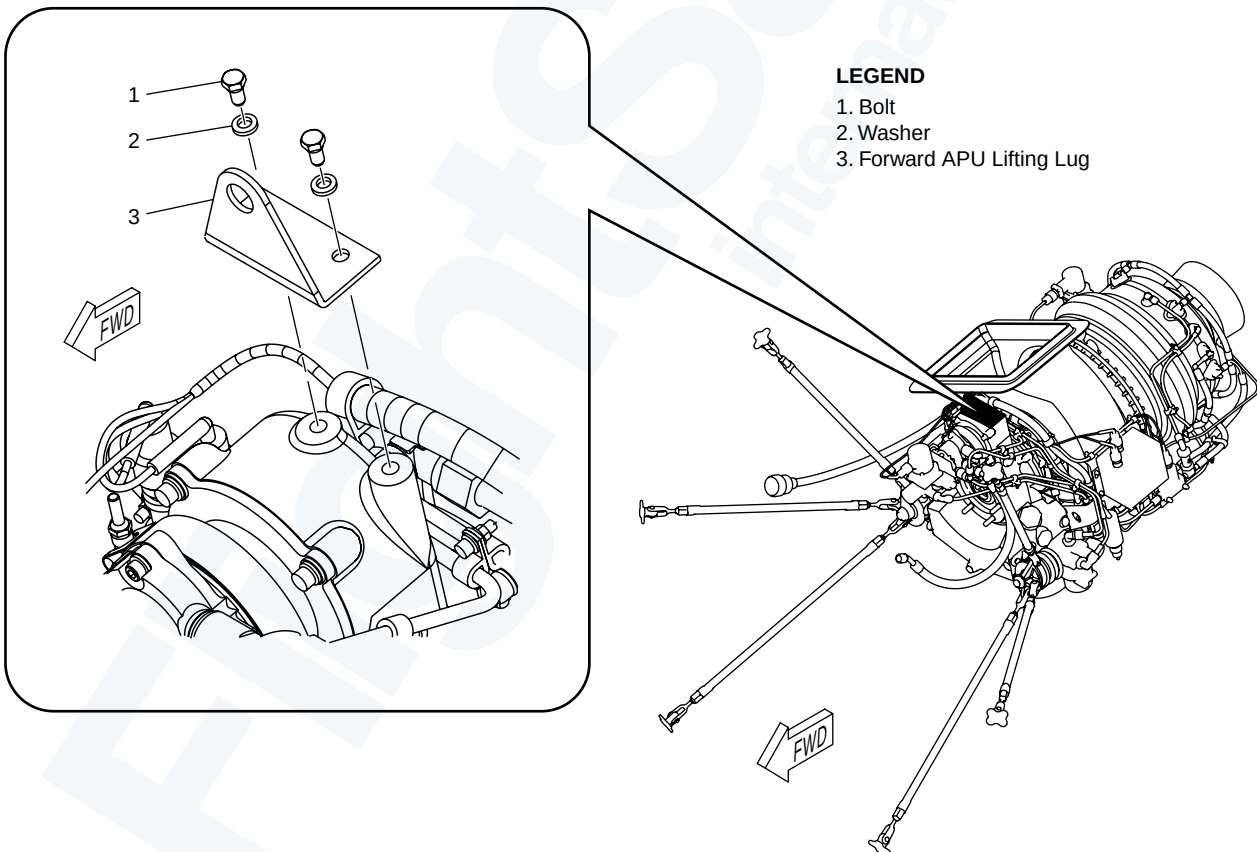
APU Engine Assembly - Removal/Installation (1 of 2)
